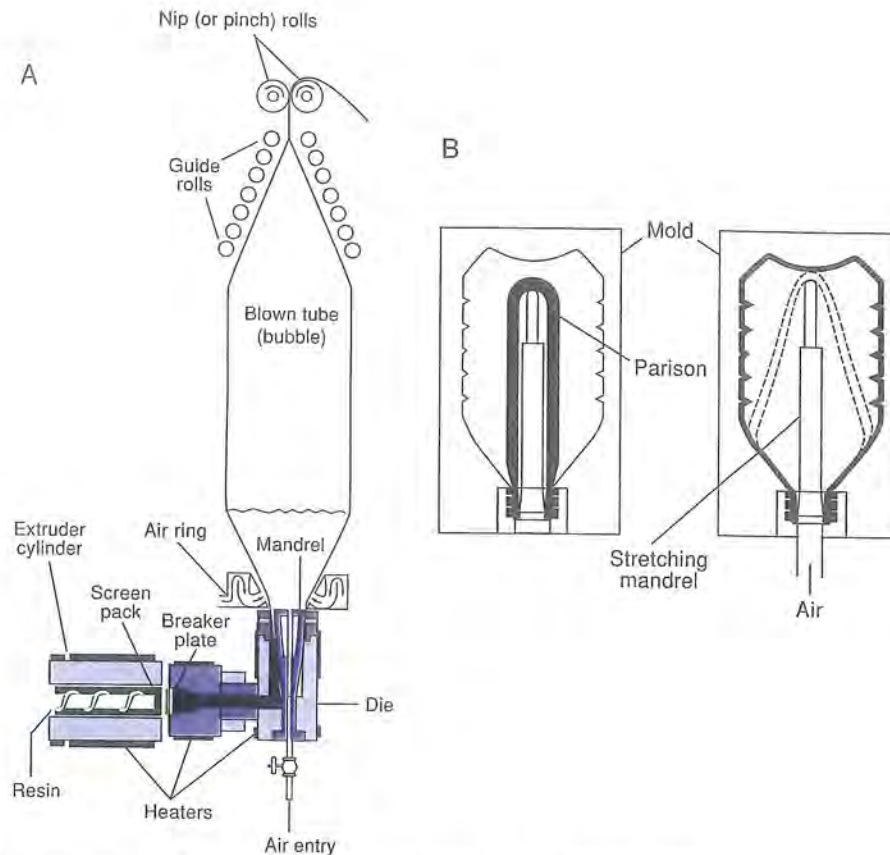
Polymer blow molding processes: (A) Forming blown film. (B) Forming a bottle.
